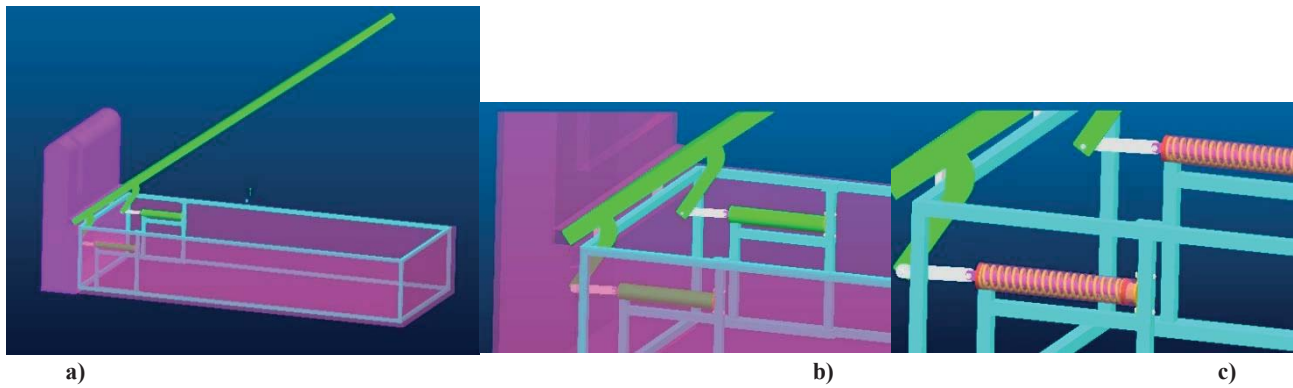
a) bed base image b) balancing mechanism c) inside view of the balancing mechanism
